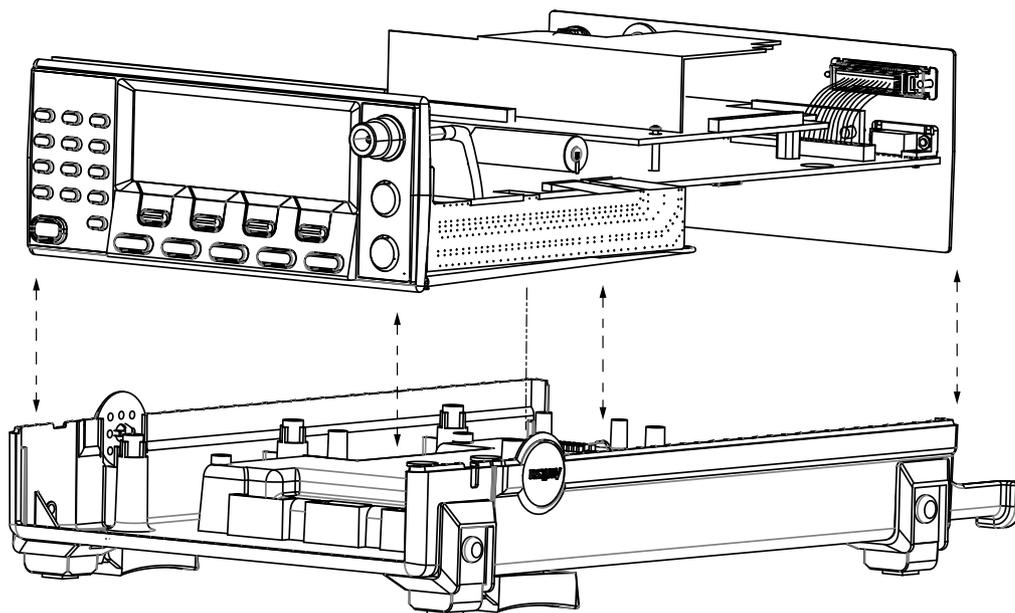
Lift Main PCB - Rear Panel - Front Panel Assembly
